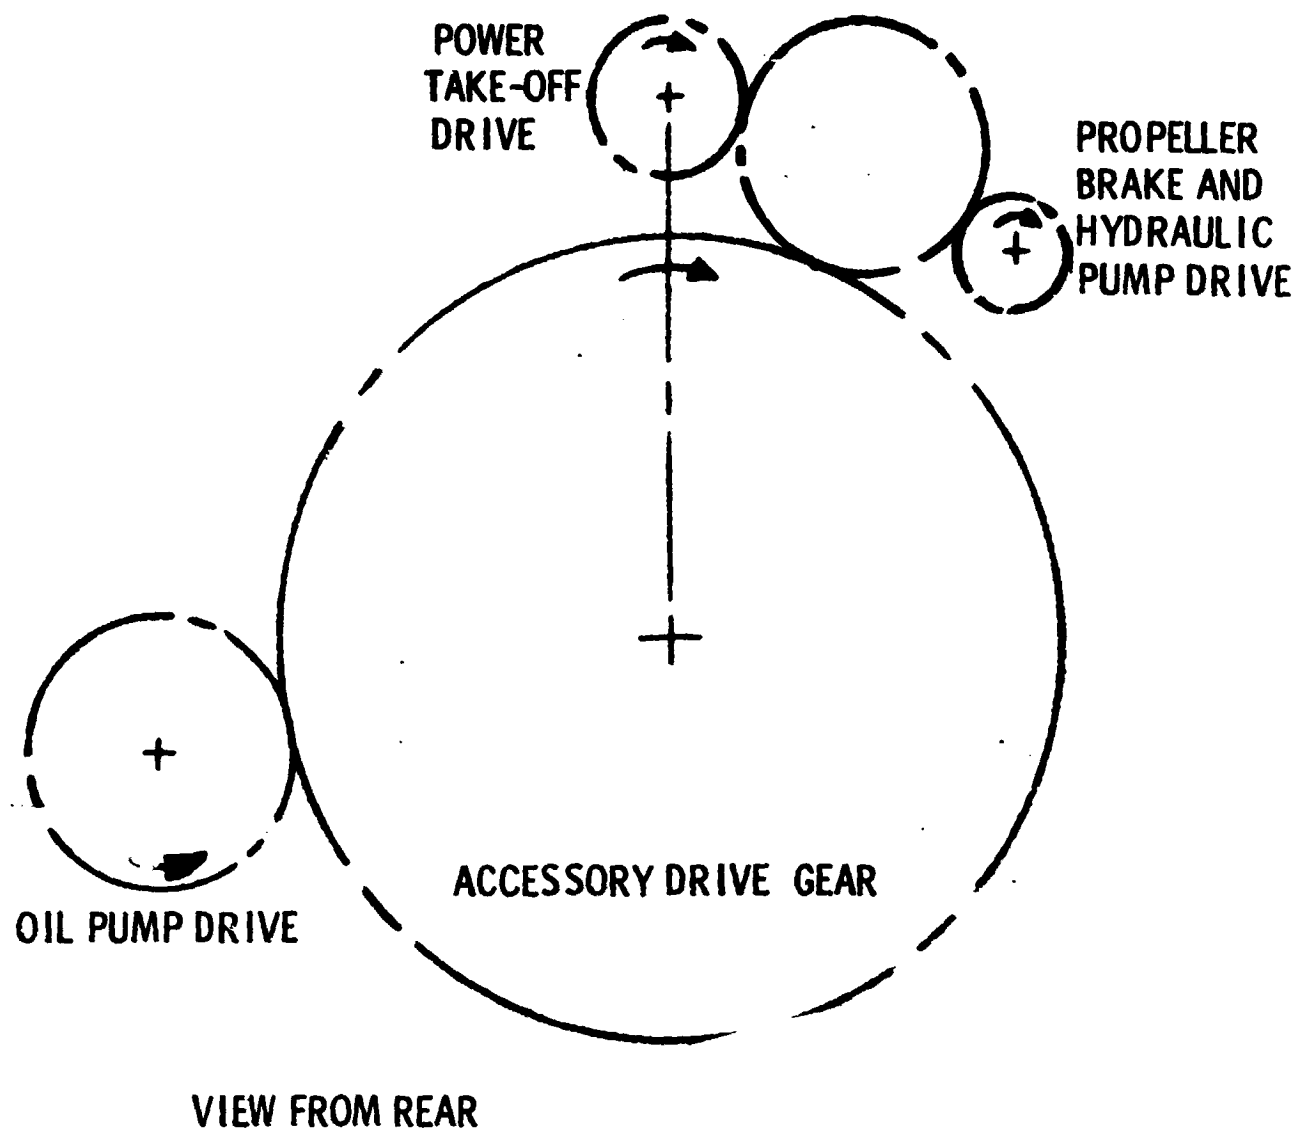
Advanced reduction gearbox accessory drive train.
